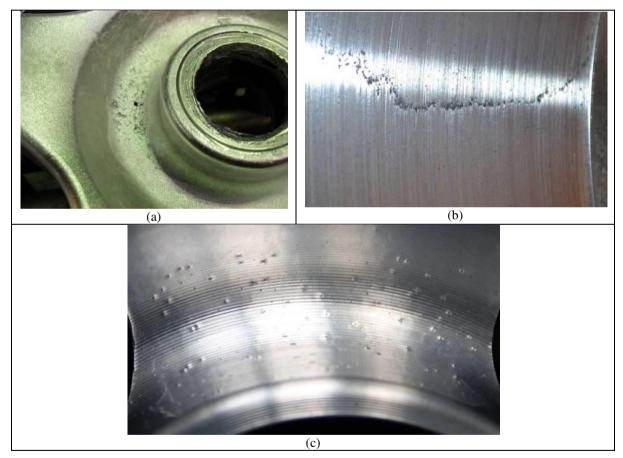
Defects of light alloy wheel [6]: a - shrink cavity, b - crack, c - porosity.
